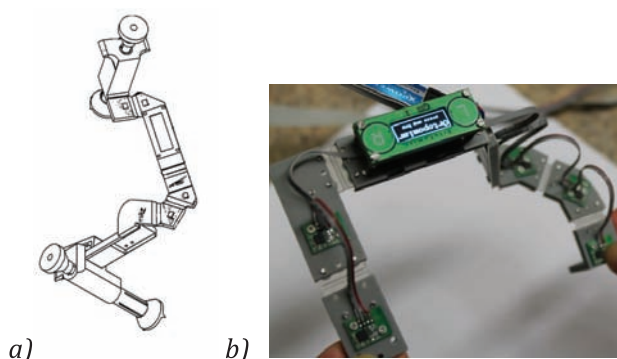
6D arm a) CAD model; b) 3D printed model
